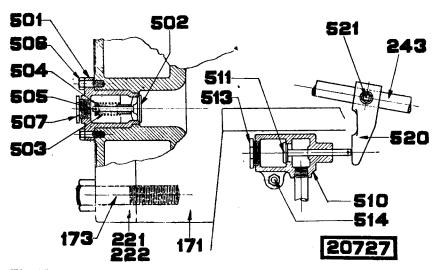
Air Starter Arrangement for Head and Side of Cylinder.
